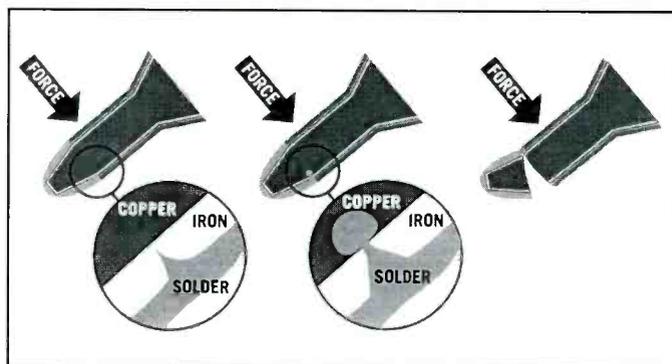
If the iron plating on the soldering iron tip cracks, once the copper core is exposed, solder will quickly dissolve some of the copper away, hollowing out the tip.
